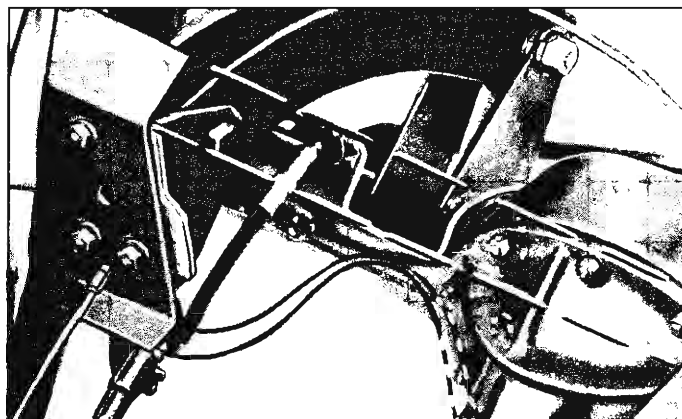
Rear Suspension Upper Control Arm Attaching Points
